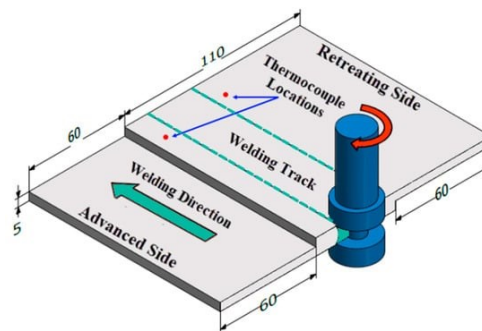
Dimensions of BT-FSW lap joint (all dimensions in mm).
